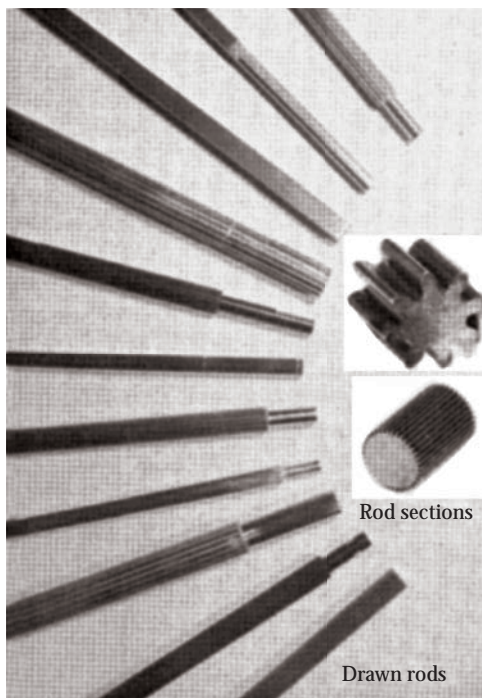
Samples of cold-drawn rod stock for making gears and pinions. (Courtesy of Rathbone Corp., Palmer, Massachusetts.)
